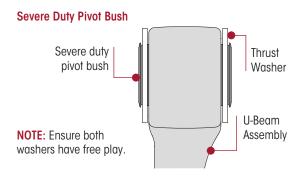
Severe-duty Pivot Bush Thrust Washer Check
